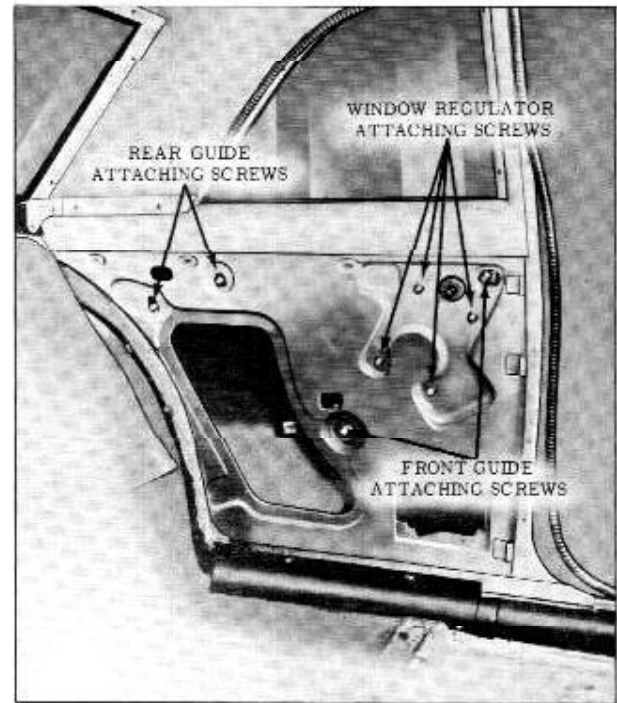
Rear Quarter Hardware "17-27" Styles
